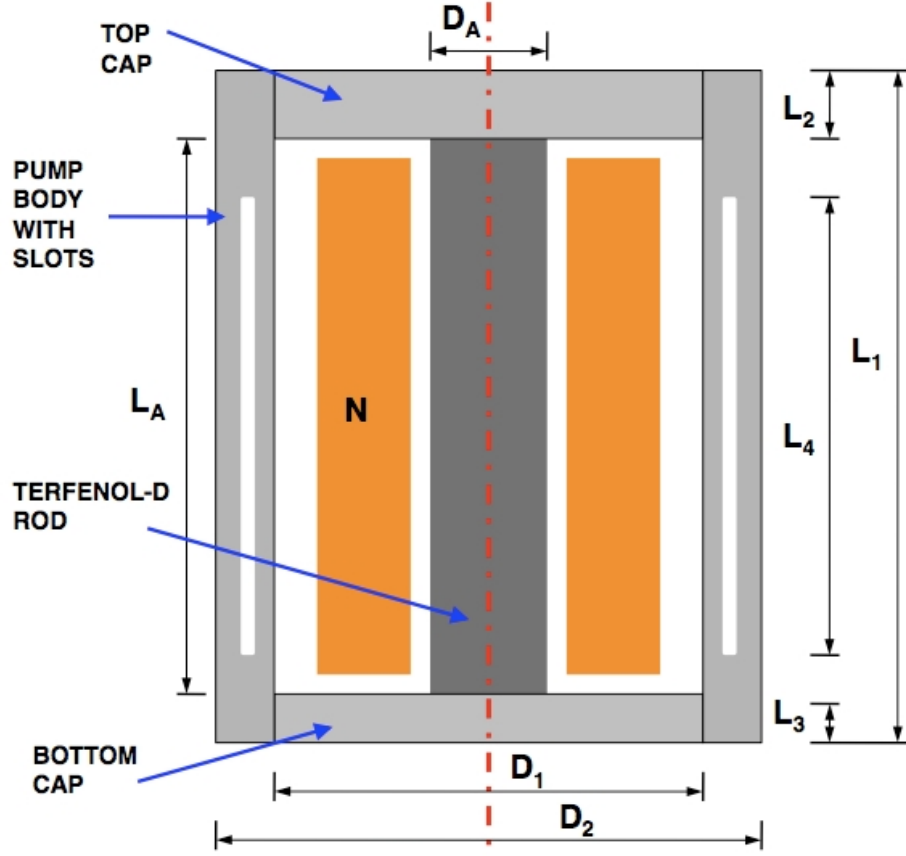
Cross-sectional view of pump body with Terfenol-D rod
